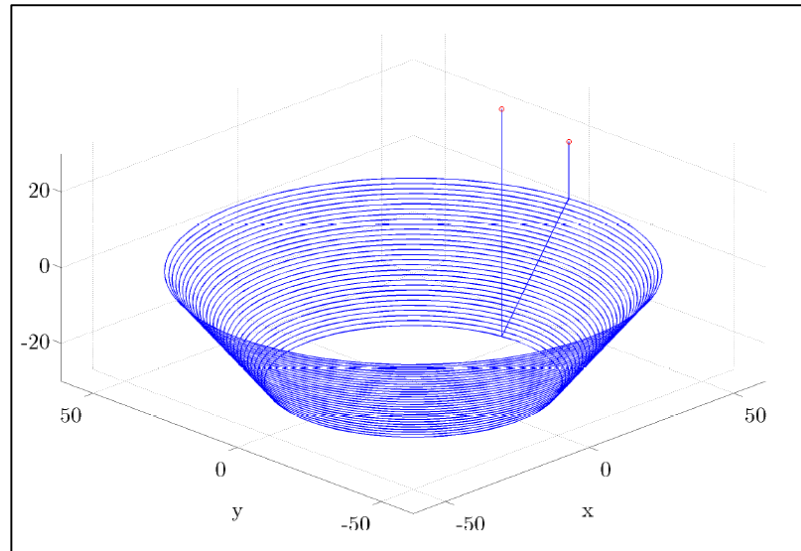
An example of tool path generated by POWERMILL to use in CNC machine.
